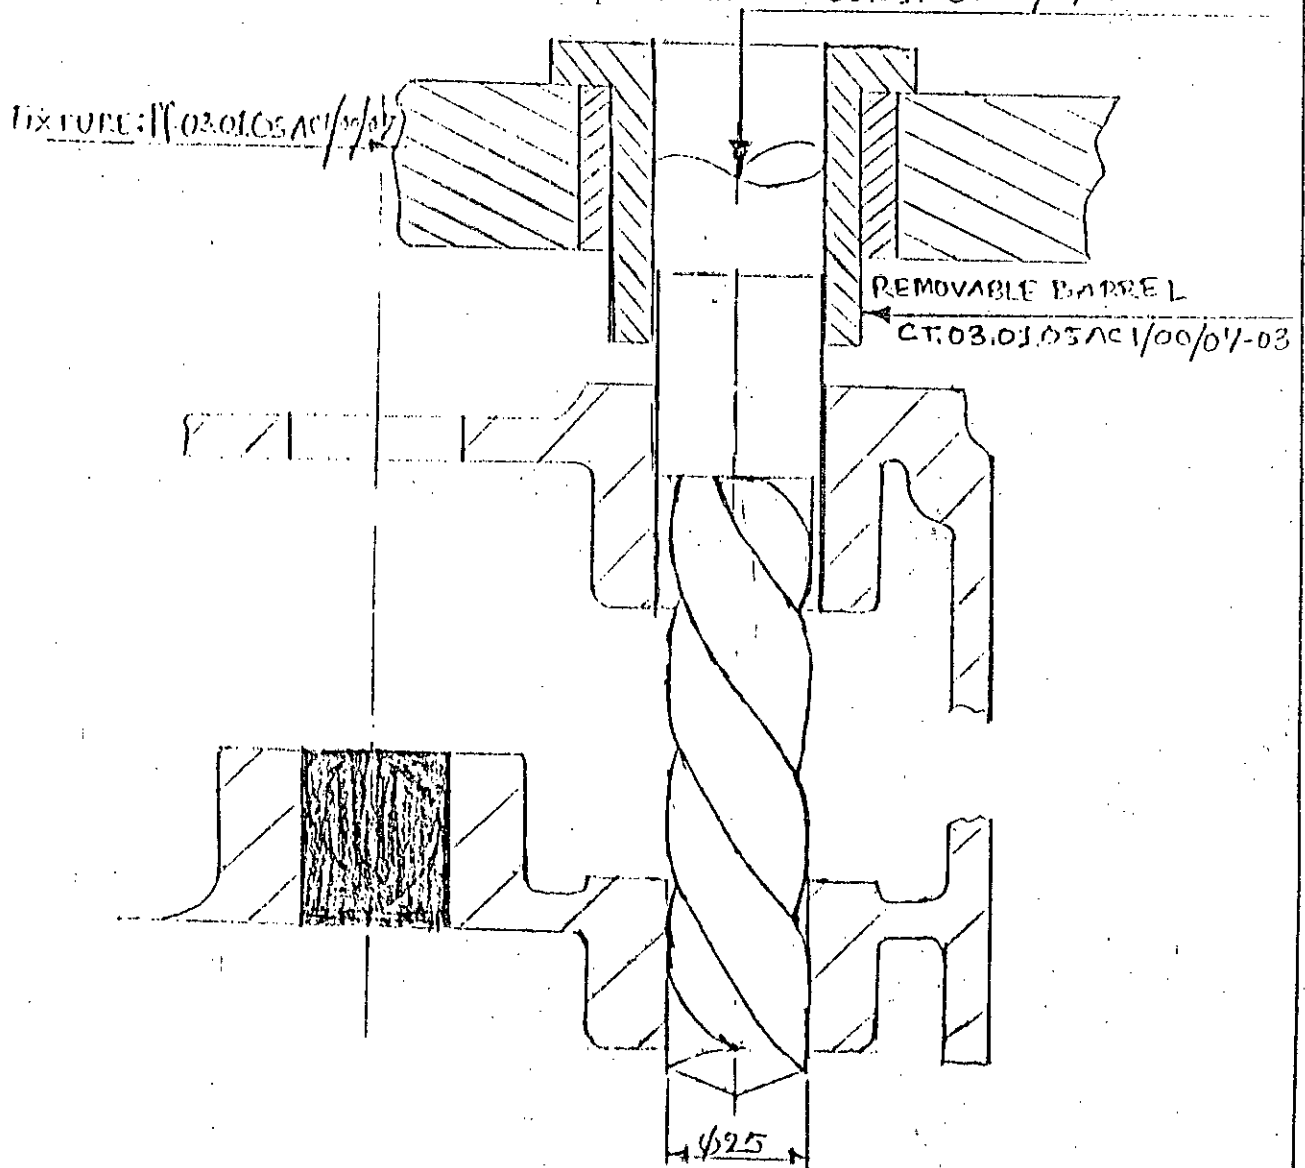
DRILLING OPERATION OF HOLE ϕ 25
